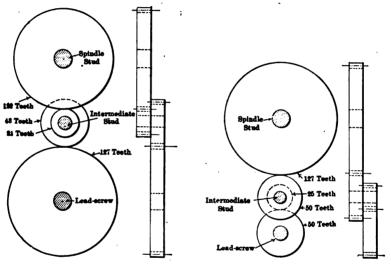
Example of Gearing for Cutting Metric Thread with English Lead-Screw.
